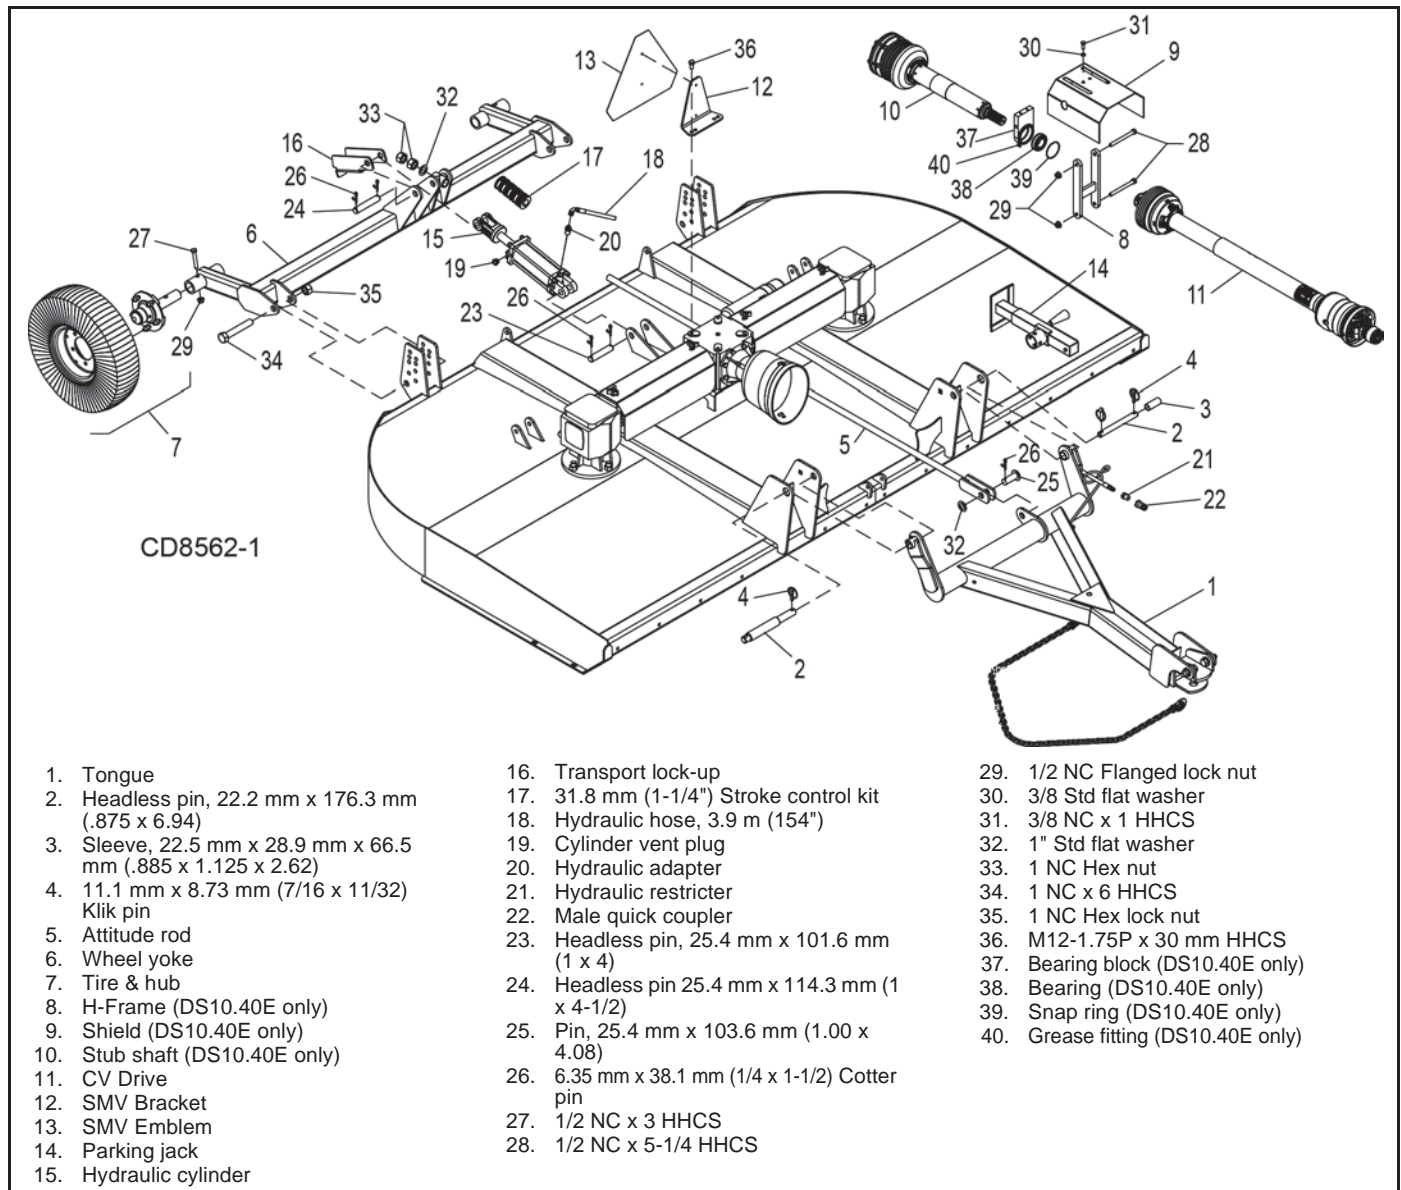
DS8.30E & DS10.40E Pull-Type Assembly
